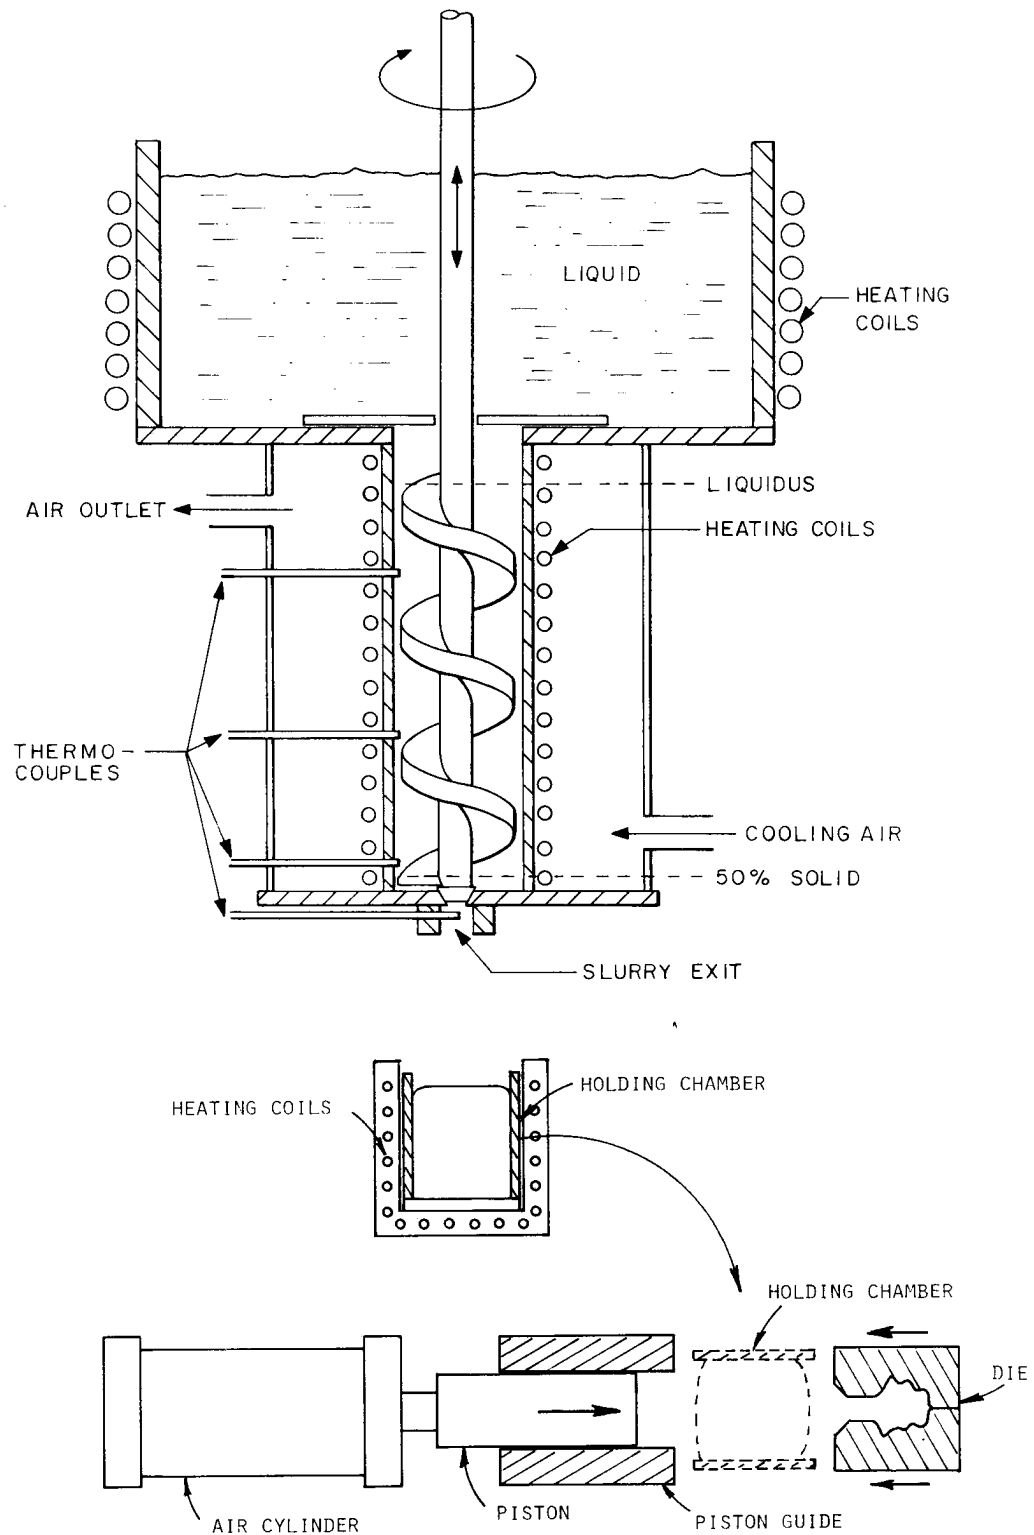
Schematic diagram of continuous slurry producer, "gel" chamber, and casting machine.
